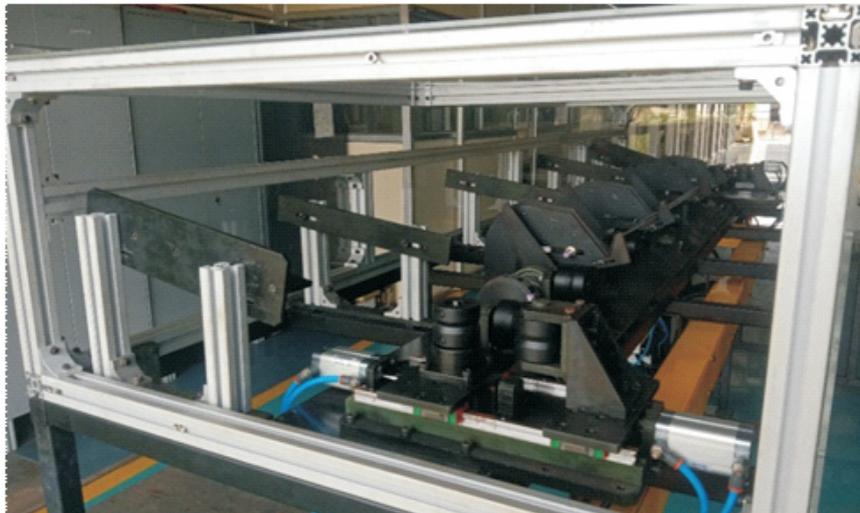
Driving roller second assembly and system with glove-box with exit bin.
